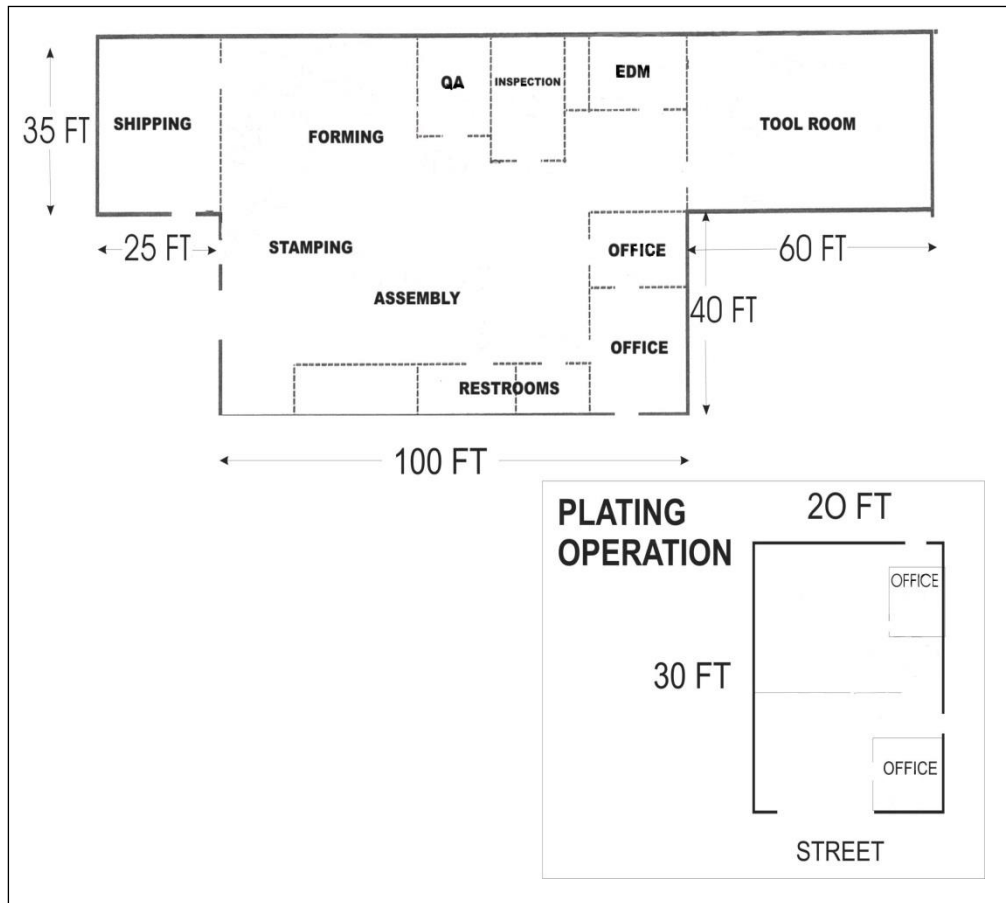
ERG Beryllium Site 6 plant layout. Note that the plating operation for this facility is located in a separate building.
